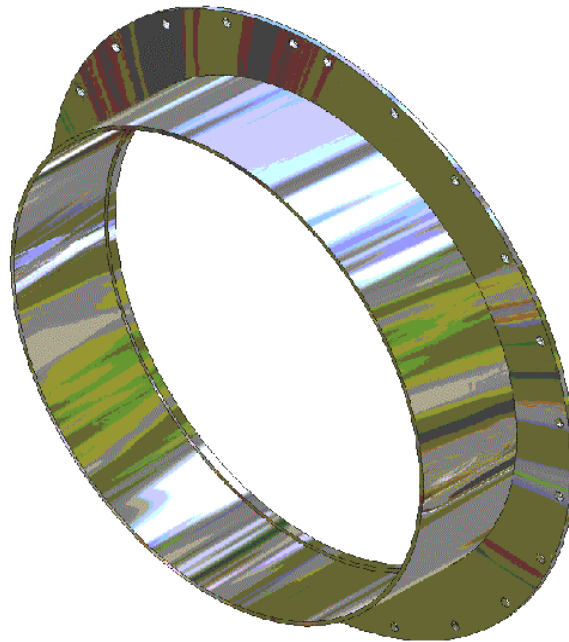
Adding the flat flange that mates up with the straight section of coil segments.
